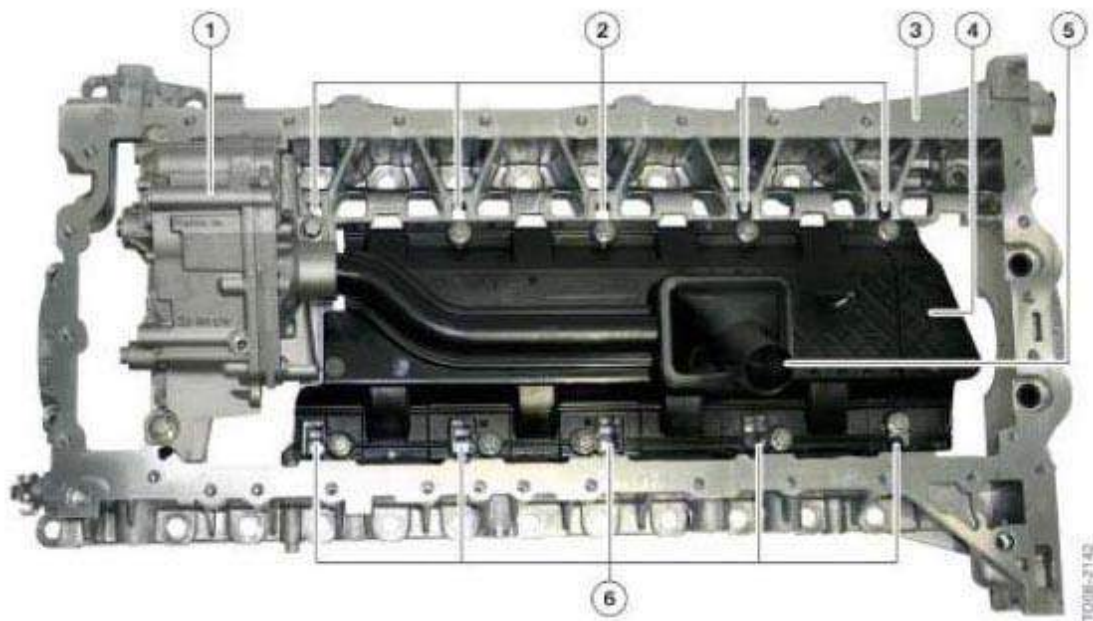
Identifying Cylinder Head, Oil Sump, Oil Deflector And Intake Snorkel
